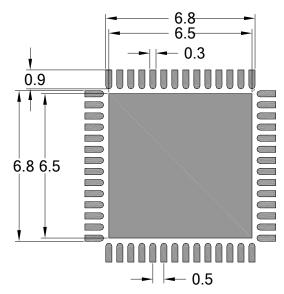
PD69208T4 Top layer Copper Recommended PCB Layout (mm)
